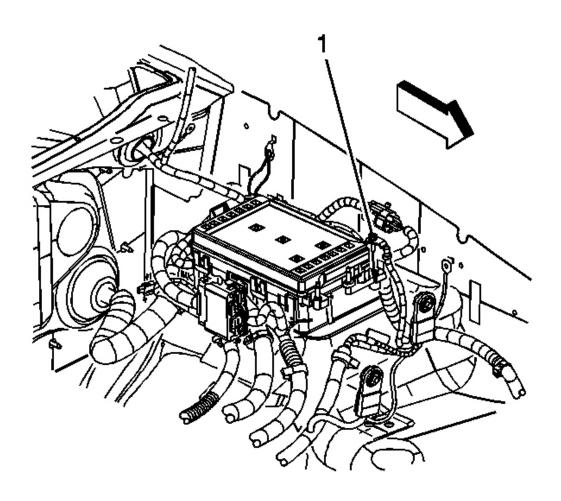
View Of Positive Cable Lead At Junction Block Courtesy of GENERAL MOTORS CORP.
